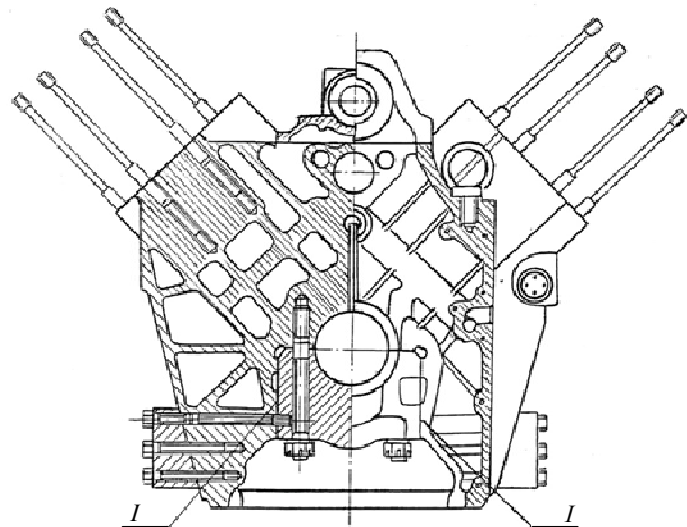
Fastening design of the main bearing cap of an engine dump truck (I – surfaces exposed to fretting wear)
